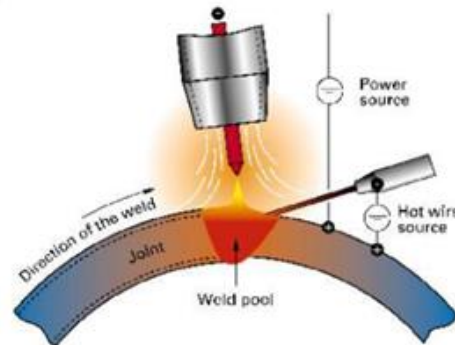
Shows the layout of hot wire TIG welding principle[13]
